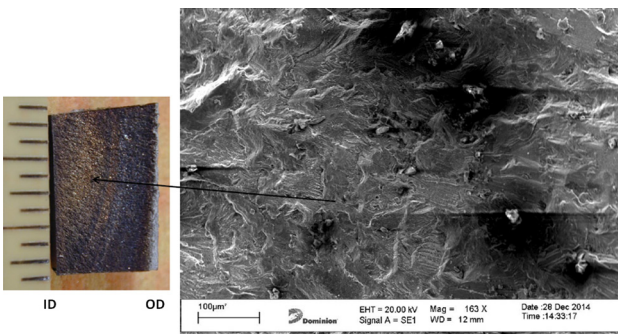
Photo of a section of the crack that was cut out and opened in lab, showing heavily oxidized fracture surface
